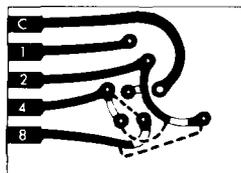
On the reverse side of the switch remove the sections indicated and install the three jumpers.
